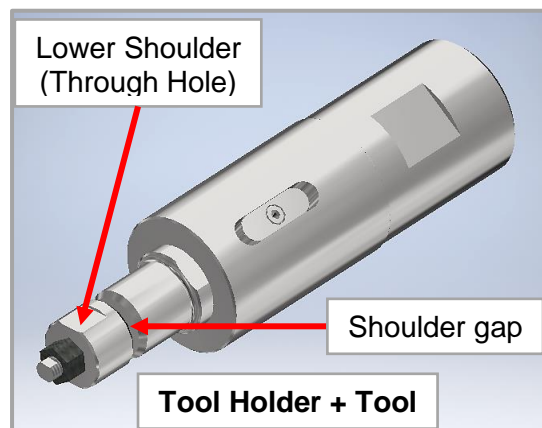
Floating Bobbin Tool assembly: Final Design
